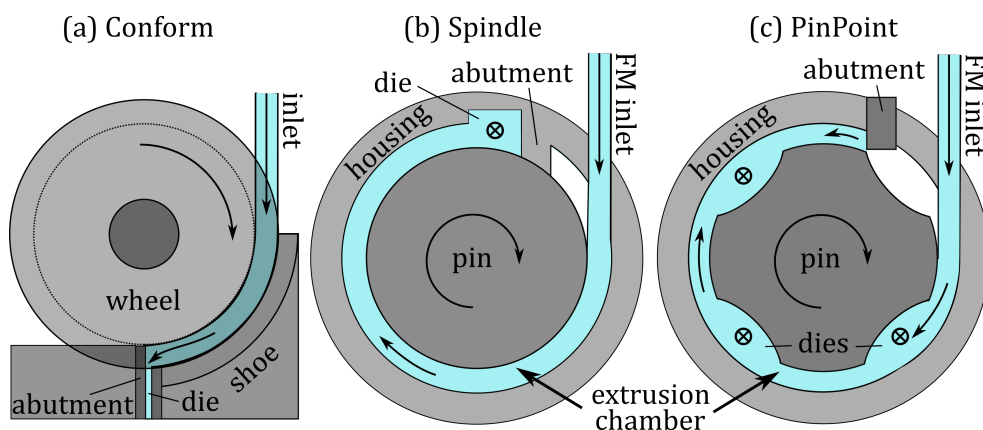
Illustration of extruder tools used for continuous extrusion of FM. (a) Tool used in the original Conform process. Inspired by [97]. The FM is fed into a passageway between a rotating wheel and a stationary shoe, and rotates with the wheel due to frictional drag, until it hits an abutment. In the abutment there is a narrow die, so that the FM becomes continuously extruded through the die. (b) HYB Spindle extruder tool seen from the top. Adapted from [92]. The FM is fed into a narrow space in between a rotating pin and a stationary steel housing, and follows the pin movement due to the imposed frictional grip. The FM moves around with the pin until it hits an abutment integrated into the stationary housing, and is forced to flow out of a die placed right in front of the abutment. The cross indicates that the FM moves into the paper direction as it moves out of the die. (c) HYB PinPoint extruder tool seen from the top. Adapted from [101]. This tool is somewhat similar to that in (b), with one major exception being that instead of having one stationary die in front of the abutment, the pin is integrated with four moving extrusion dies.
